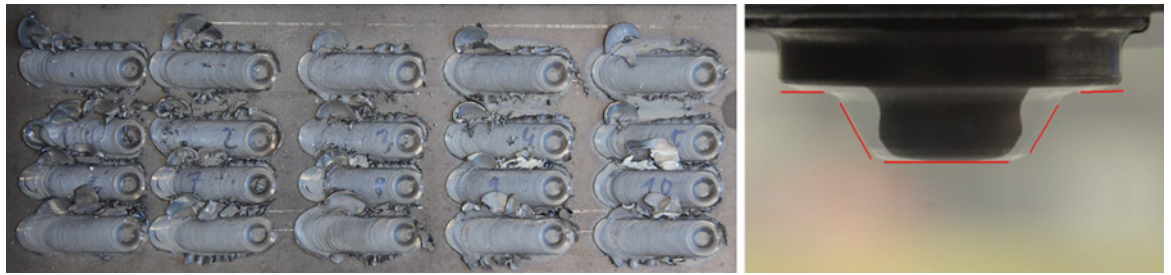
• Experimental set-up for wear resistance determination (left), Si_3N_4 -tool before and after 12 immersions and 9,5 m welding length (right).
